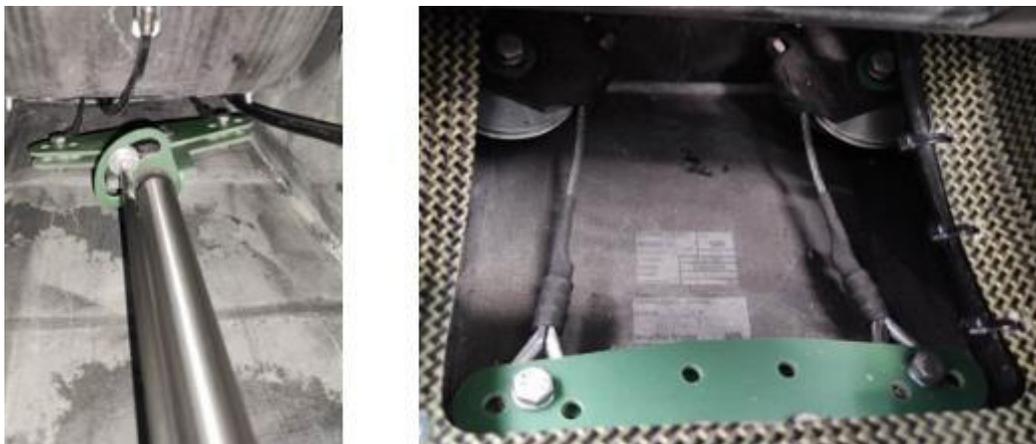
View through hole in front of rear seat View through inspection window below front seat
